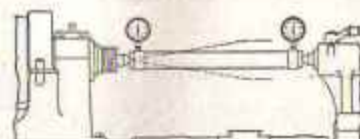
Testing Alignment of Tailstock Spindle with Headstock Spindle
